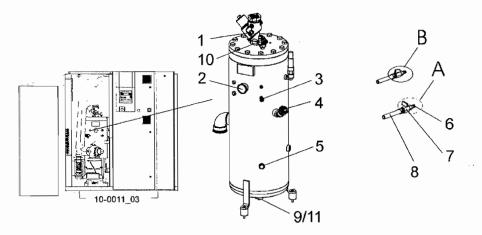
Changing the Cooling Oil, Oil Separator Tank
